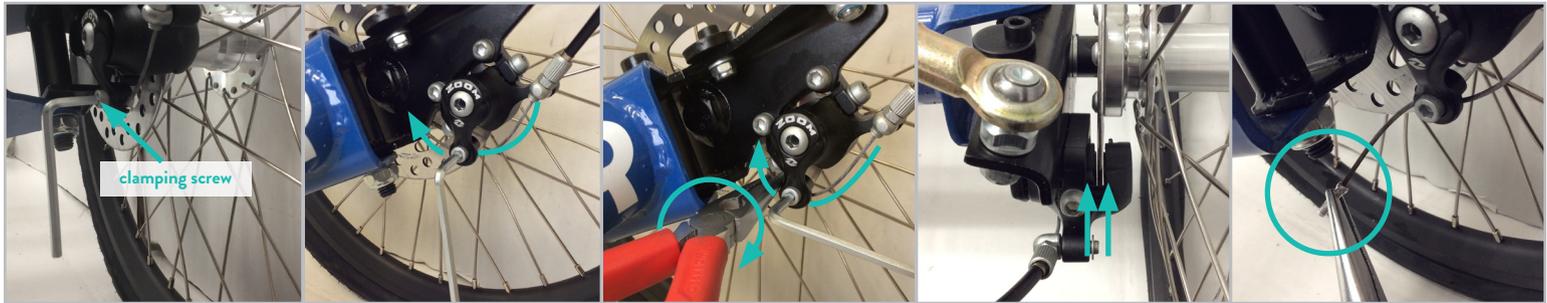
Loosen the clamping screw with the 4 mm hex wrench so there is space to route the brake cable under the nut. Grip the brake cable end with pliers, rotate the pliers to make the cable taut, then tighten the cable clamping screw. Unscrew the inner and outer brake pads so that a sliver of light can be seen between the rotor and pads and so the wheel spins freely. Bend the cable away from rotor and squeeze a cable tip onto the end of each cable. Repeat on the other brake.
